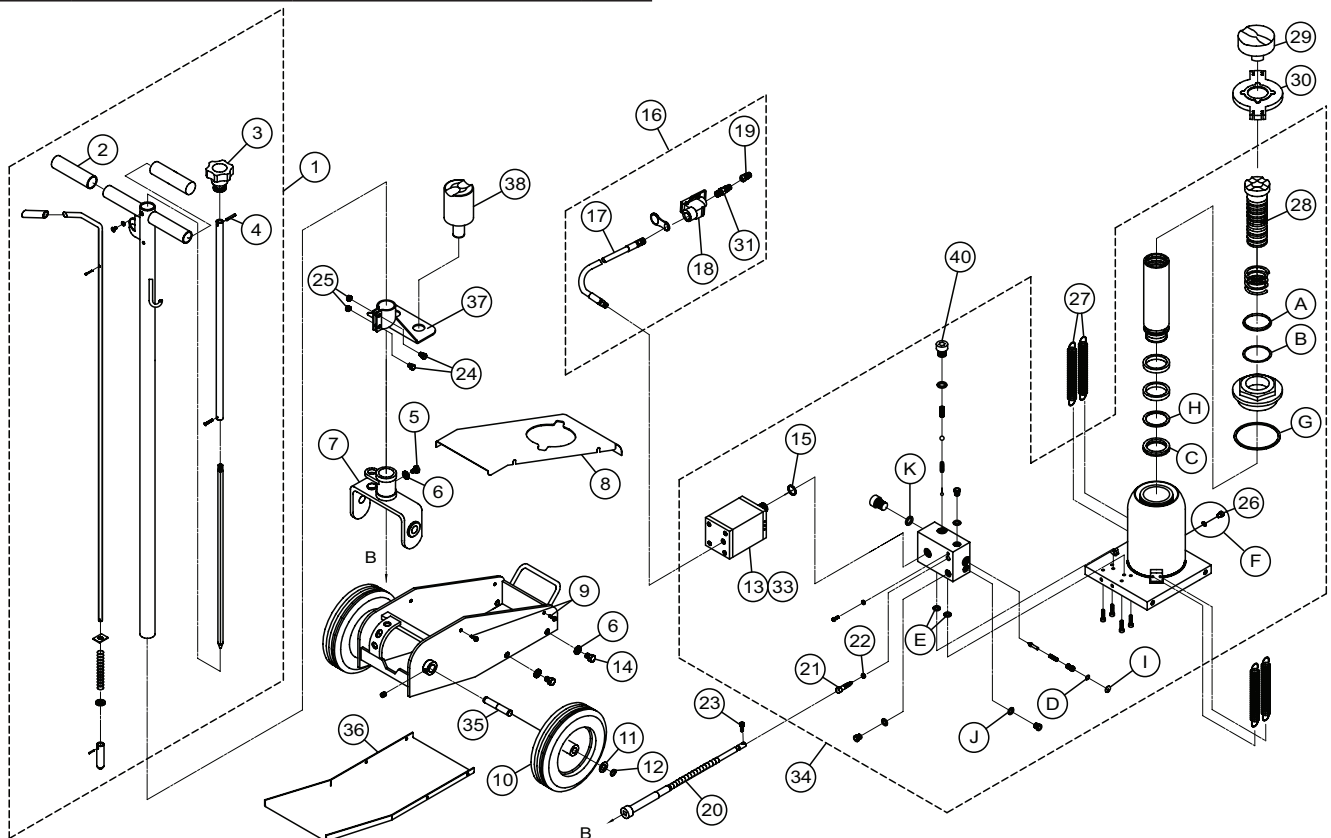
Replacement Parts Illustration for Model 23221C & 23222C
